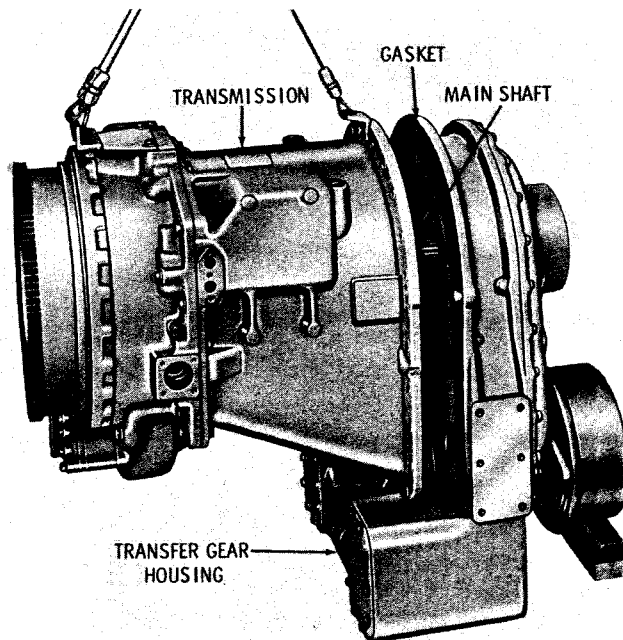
Installing transmission onto transfer gear housing assembly
